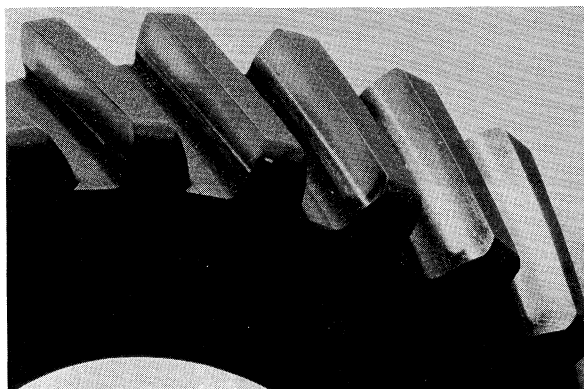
Typical honed 10-D.P. helical gear teeth with 12-mu finish along the lead and 15-mu across the profile.
